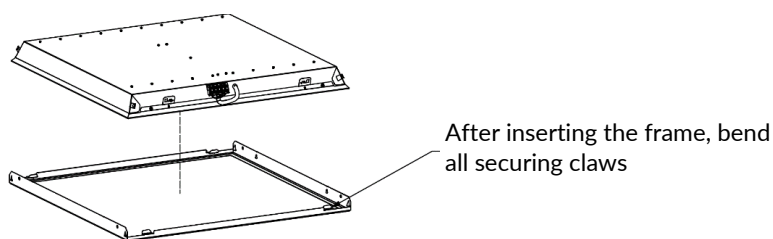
Installation of luminaire with frame into DP12 profile of ARMSTRONG Q-CLIP F ceiling
